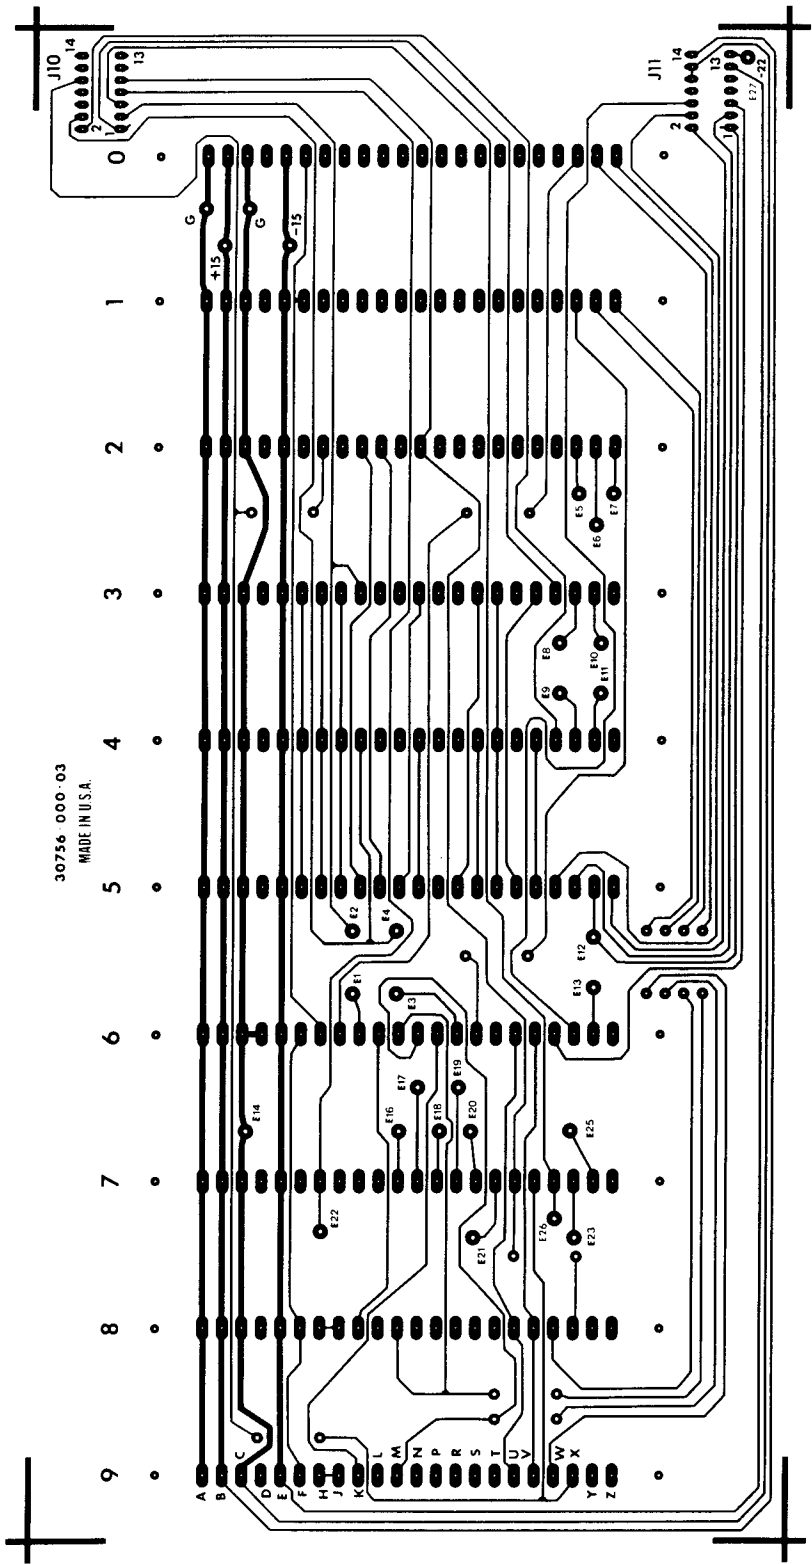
Motherboard Solder Forks, 8182A Audio Processor
